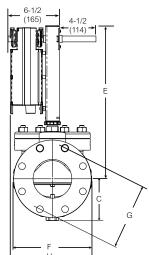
Mx41-634x-230 Actuator/Linkage Assembly
